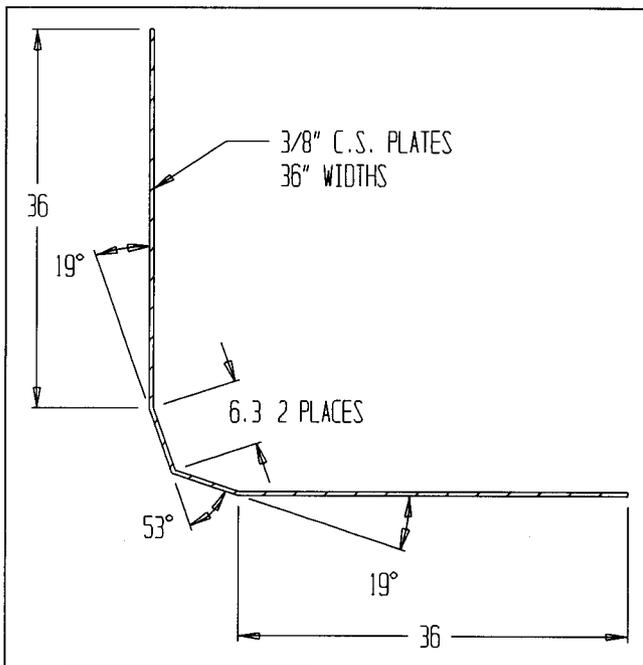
Simulated Tank Wall and Bottom Knuckle Test Fixture
